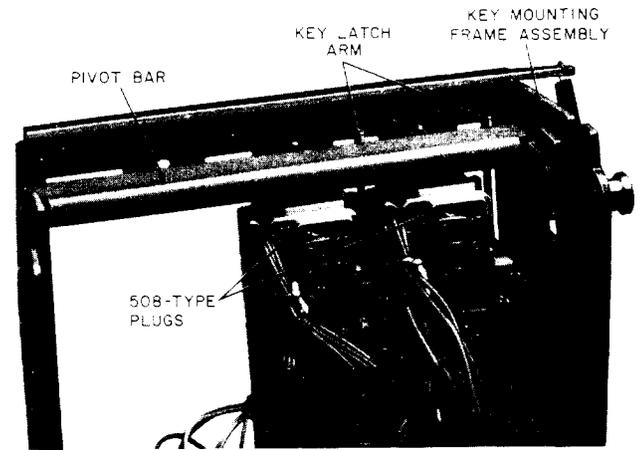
Rear View of Pivot Bar (Current Production Set Equipped With 635-Type Keys)
